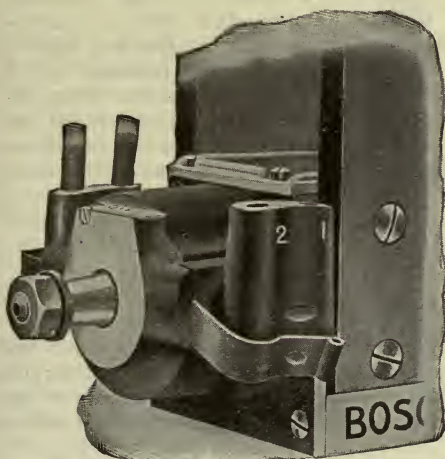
Method of Removing Brush holders. With the Spring Pushed Down, the Holder Slips Out.
